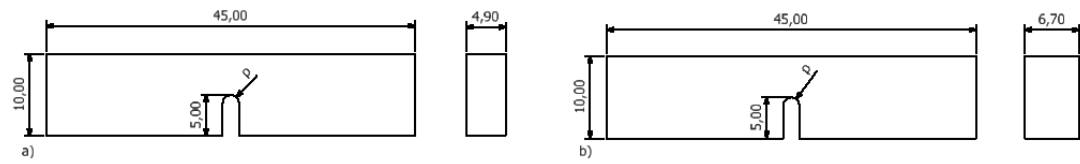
Schematic of fracture SE(B) specimens: a) Al6060-T66; b) PVC. Notch radius takes values of 0 mm (crack-like defects), 1 mm and 2 mm. Dimensions in mm.
